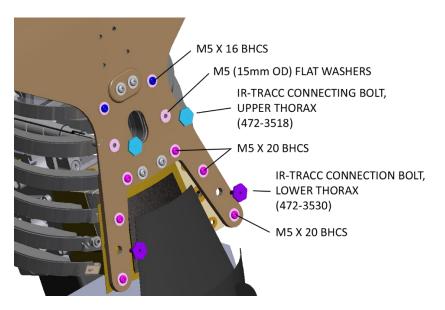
Attach the Thorax Bib Assembly to the Rib Assemblies
